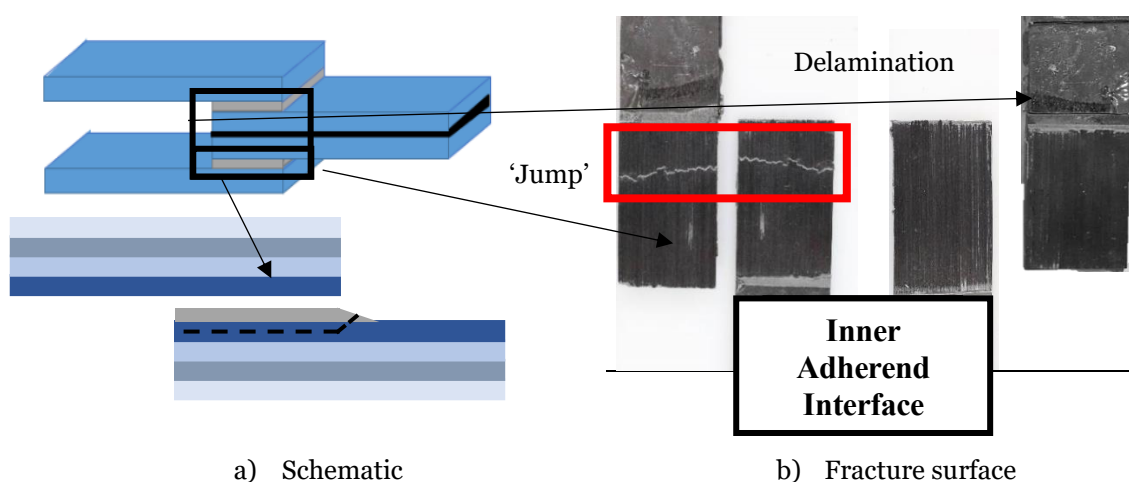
Failure schematic and fracture surface for failure within composite, F1
